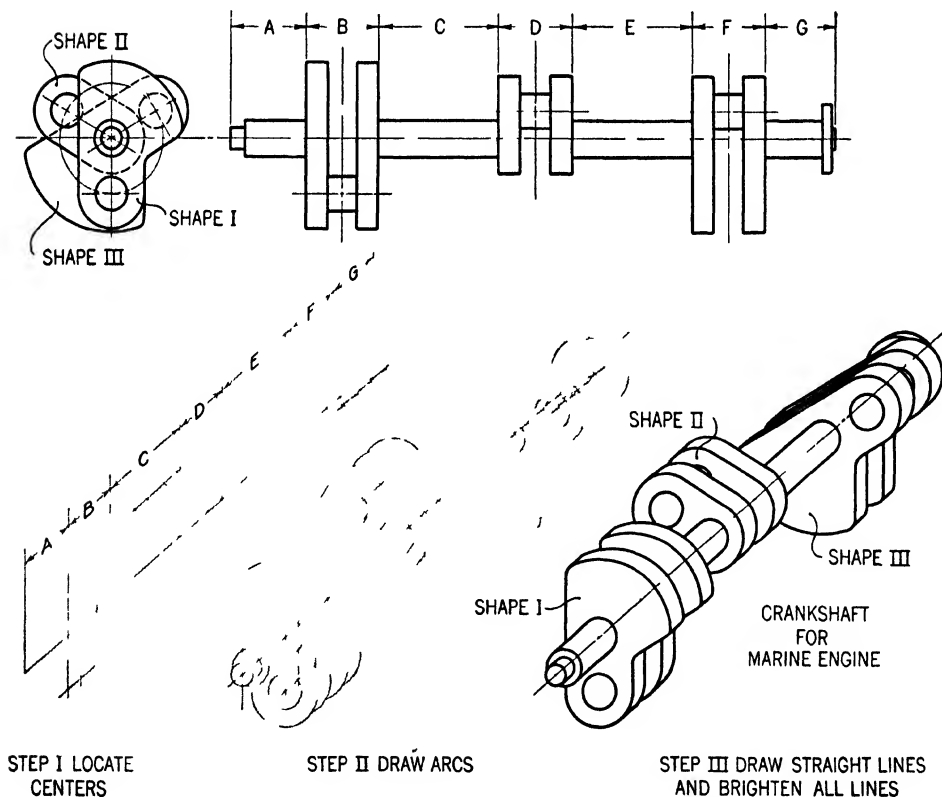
OBLIQUE PROJECTION OF A CRANKSHAFT
